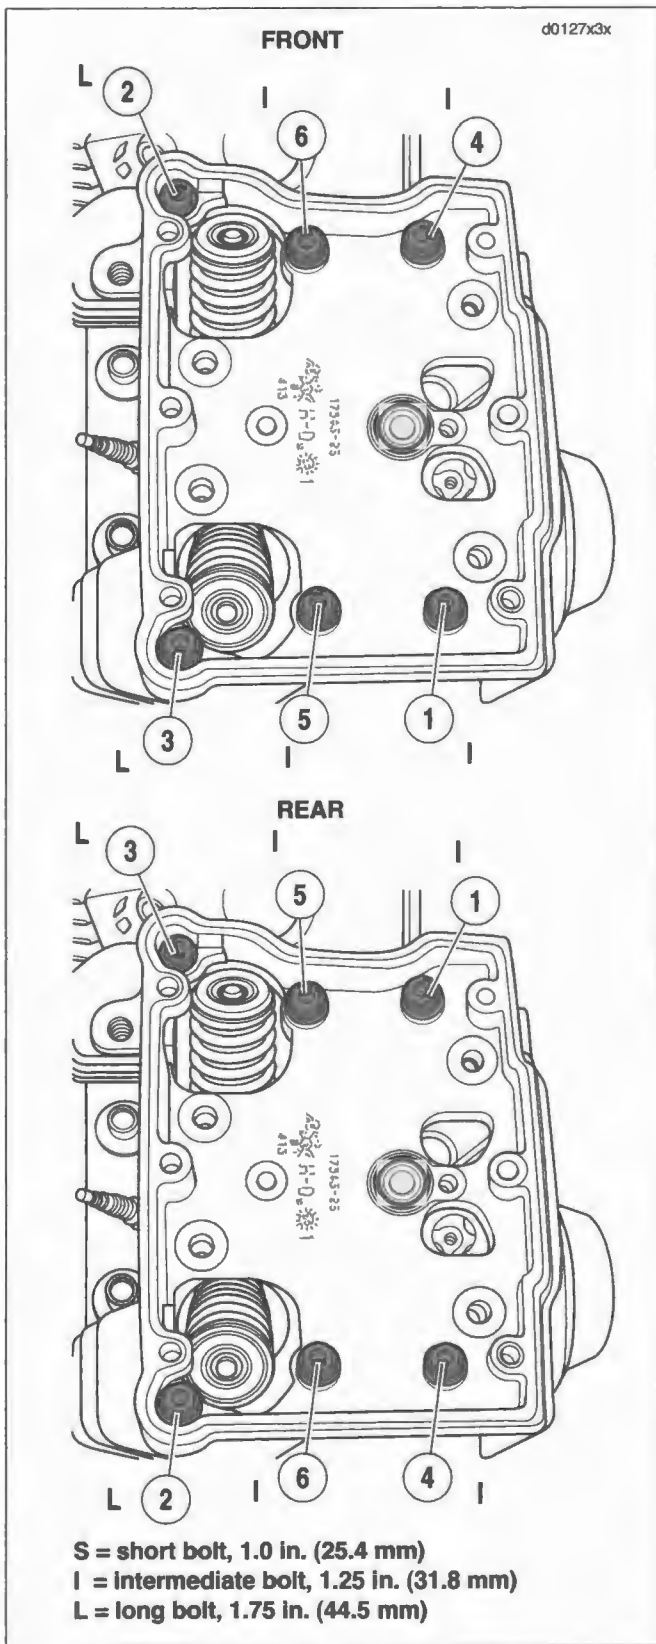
Rocker Housing Torque Sequence and Bolt Size (Rear Cylinder Shown)
